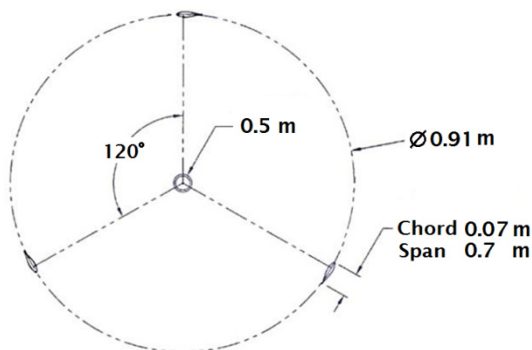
Turbine rotor sketch on top view (Rawlings, 2008).
